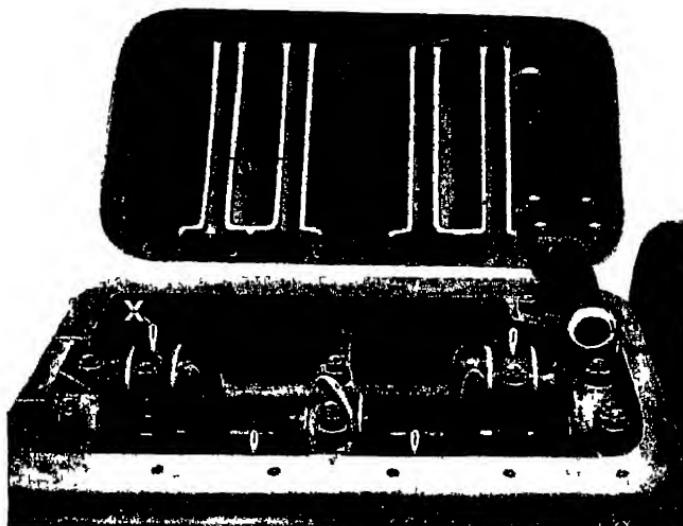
UNDERNEATH VIEW OF PETROL ENGINE CRANKCASE WITH OIL SUMP REMOVED
